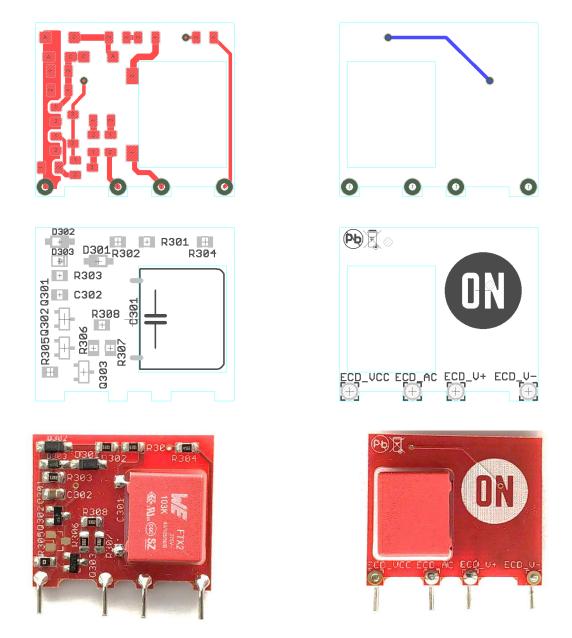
EMI Capacitor Discharging Module (MOD101) – PCB Layout Design, Assembling, Photographs
